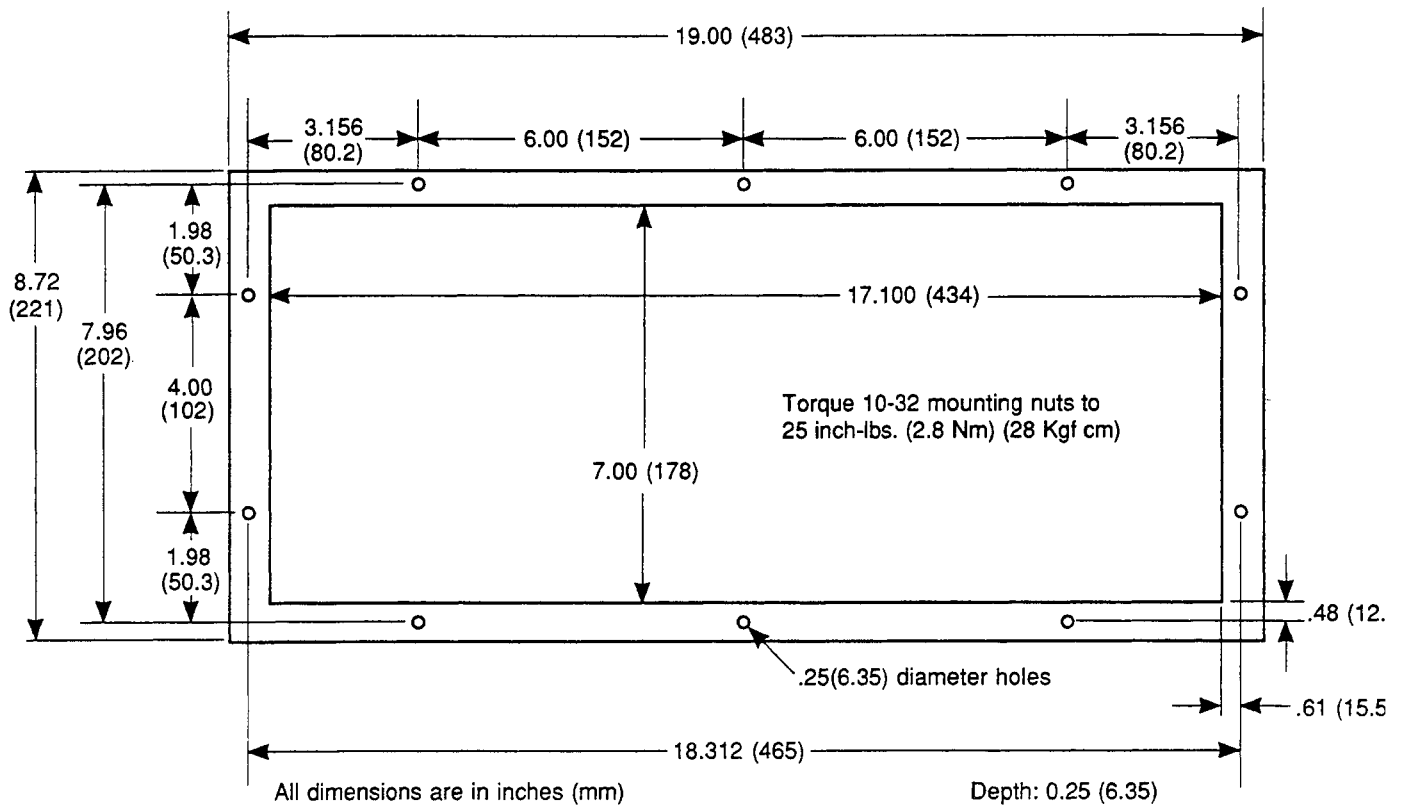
8000-KB5 and 8000-KB6 Keyboard Cutout Dimensions
